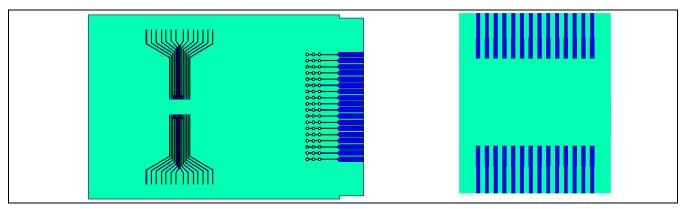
PCB reference layout (according to JEDEC 1s0P) left: Reference layout right: detail of footprint
